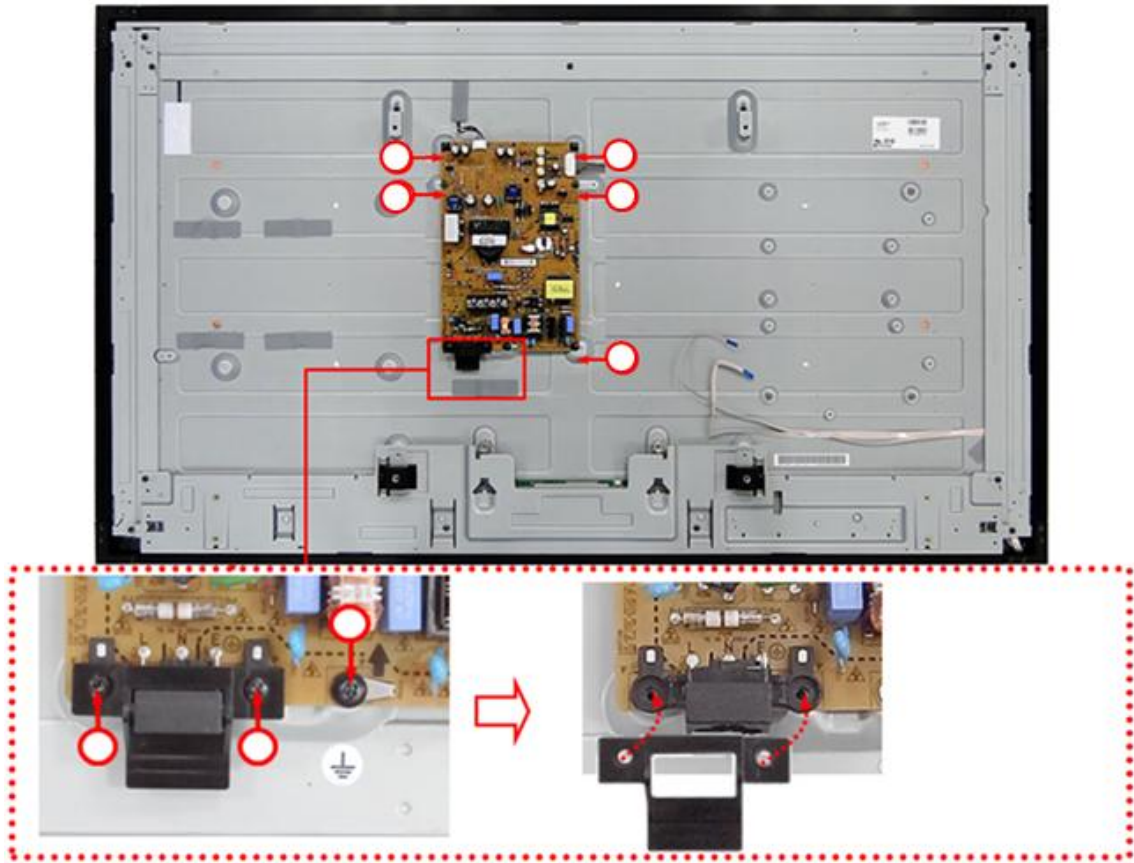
Remove Screw 8EA & Disassemble AC socket cover
